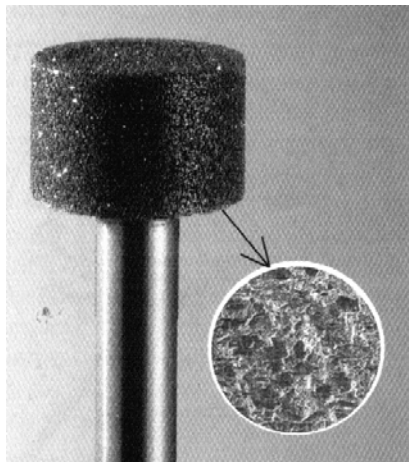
CBN grinding wheel with metal bond mounted on the grinding pin and the enlarged active surface fragment with visible grain layout
